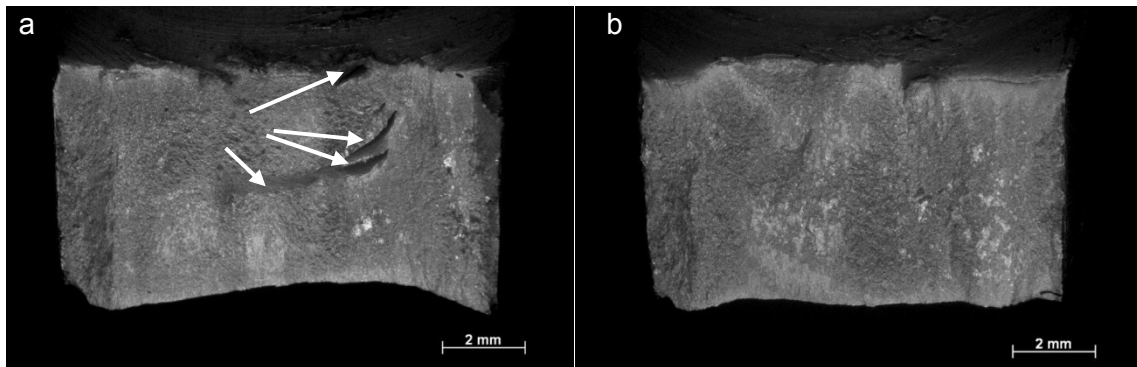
Fracture surface appearance of tensile samples for welds made at 500rev/min and 1500mm/min, with a down force of (a) “W8” [52kN] and (b) “W9” [59kN].
